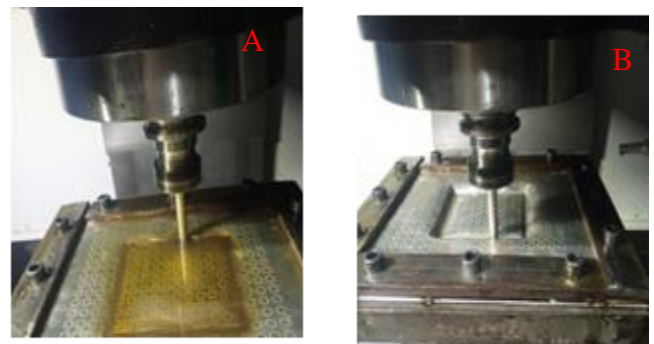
SPIF experiment in CNC milling machine; (A) At the end of half depth of tool, (B) At the end of full depth of tool
